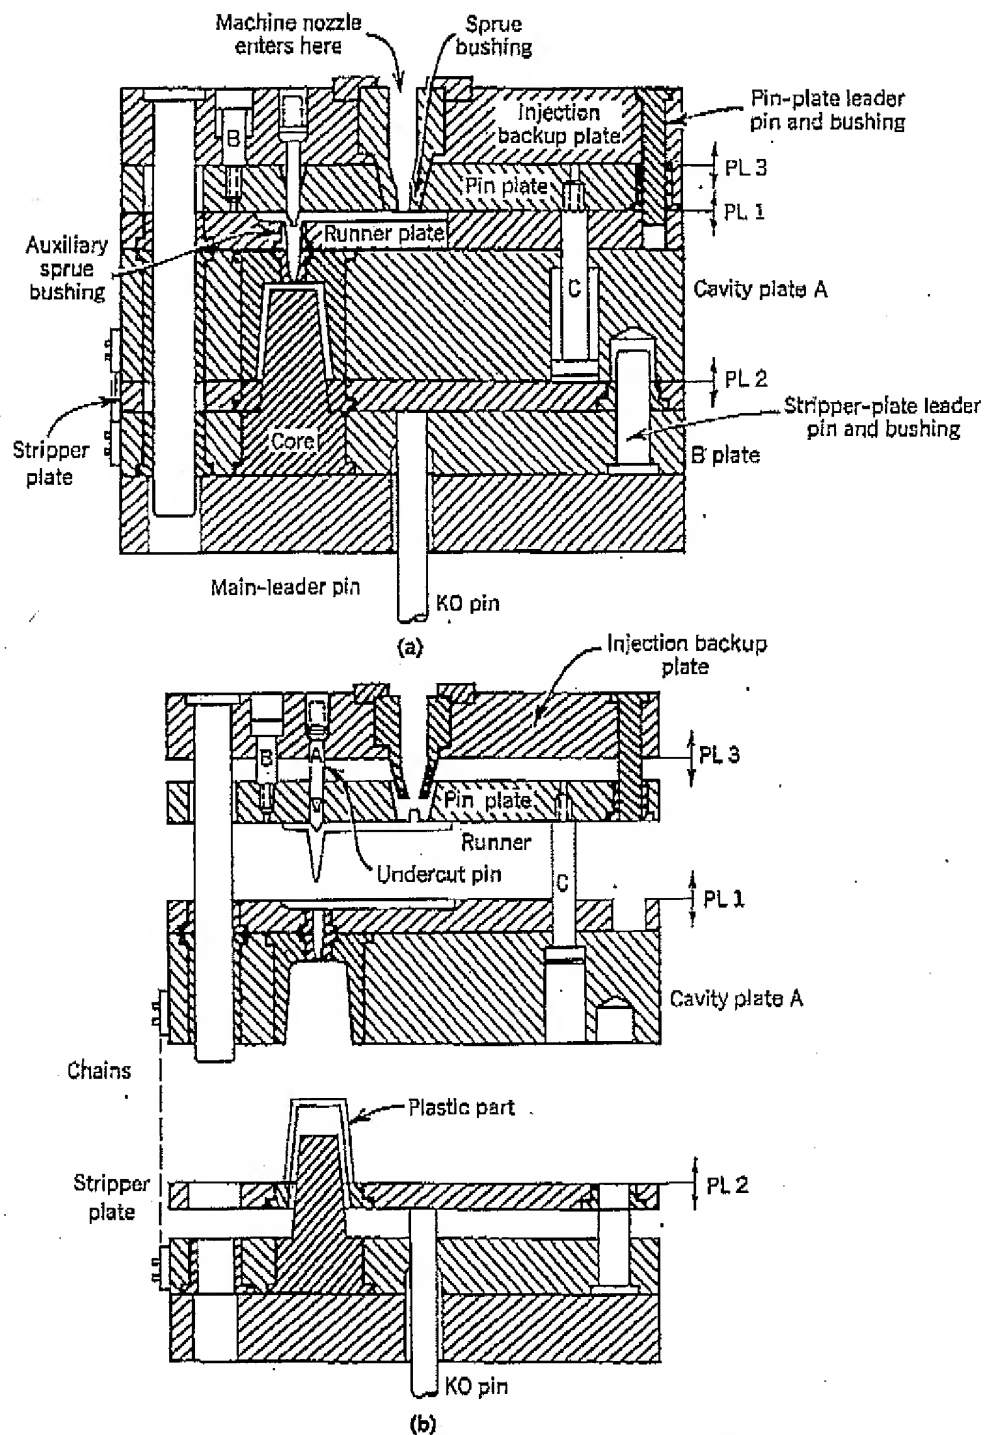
Three-plate mold in (a) closed position and (b) open position. A, undercut pins; B, C, stripper bolts.
